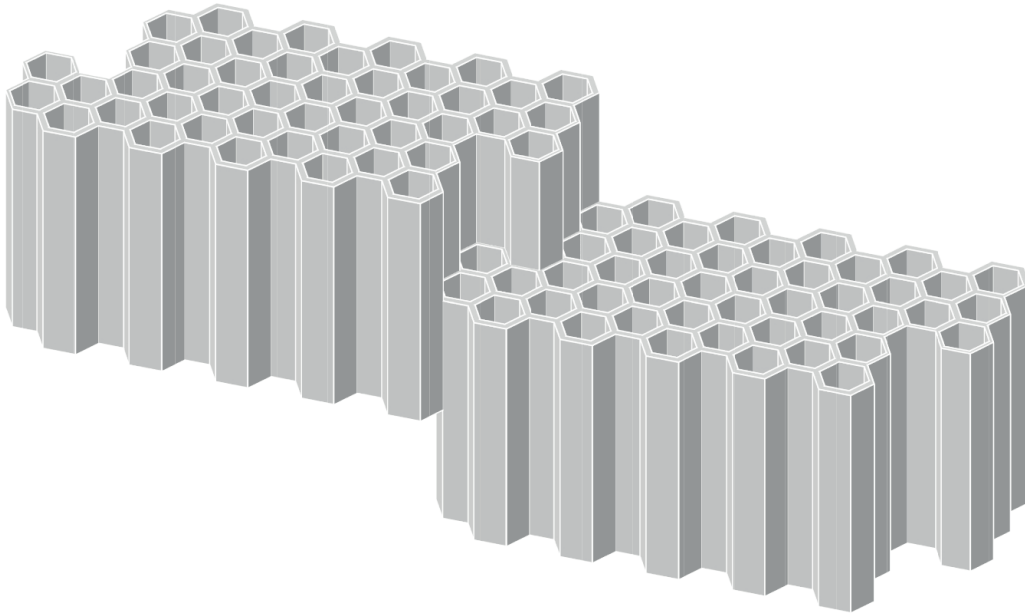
| 3D printable block with honeycomb geometry and possible assembly system.
